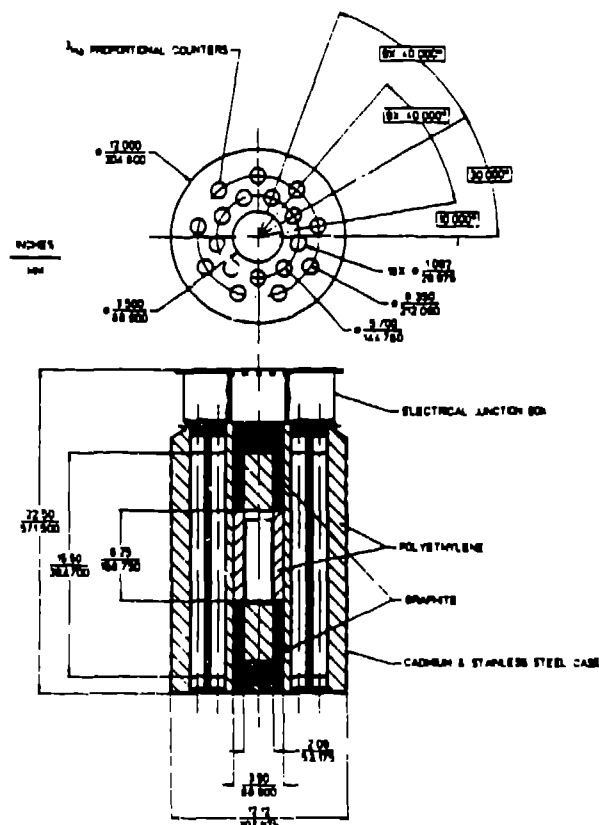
Cross-section views of the INVS Model IV geometry. Dimensions are given in both inches and millimeters. The bottom end plug without the germanium detector is shown.
